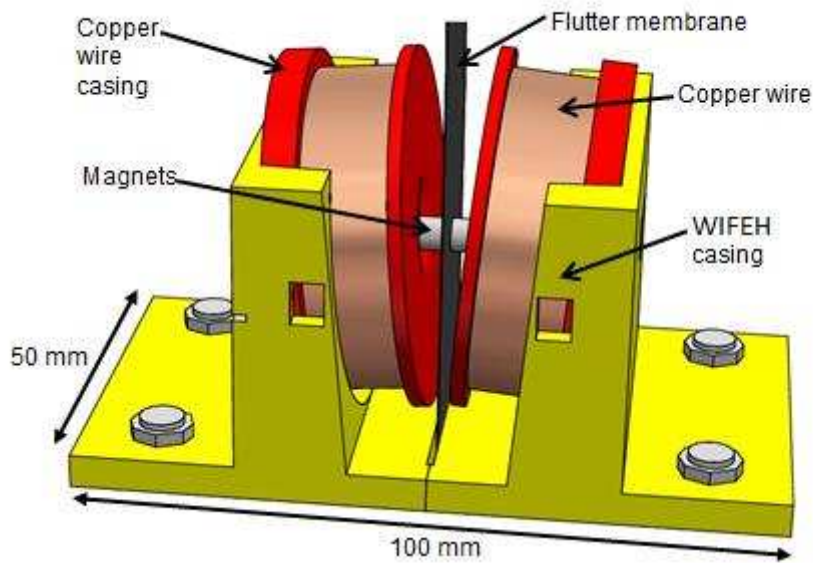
Schematic and dimensions of 3D-printed WIFEH prototype
